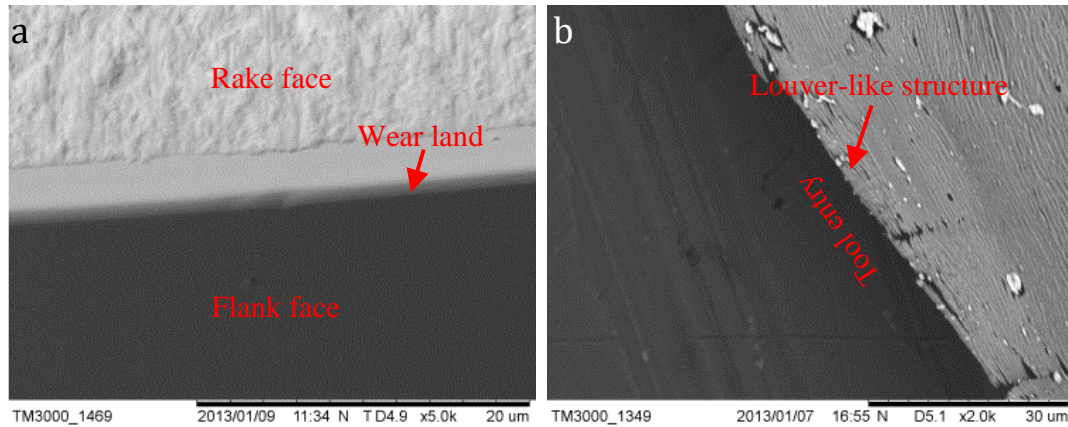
(a) Tool flank wear, and (b) the louver-like structure caused by it
